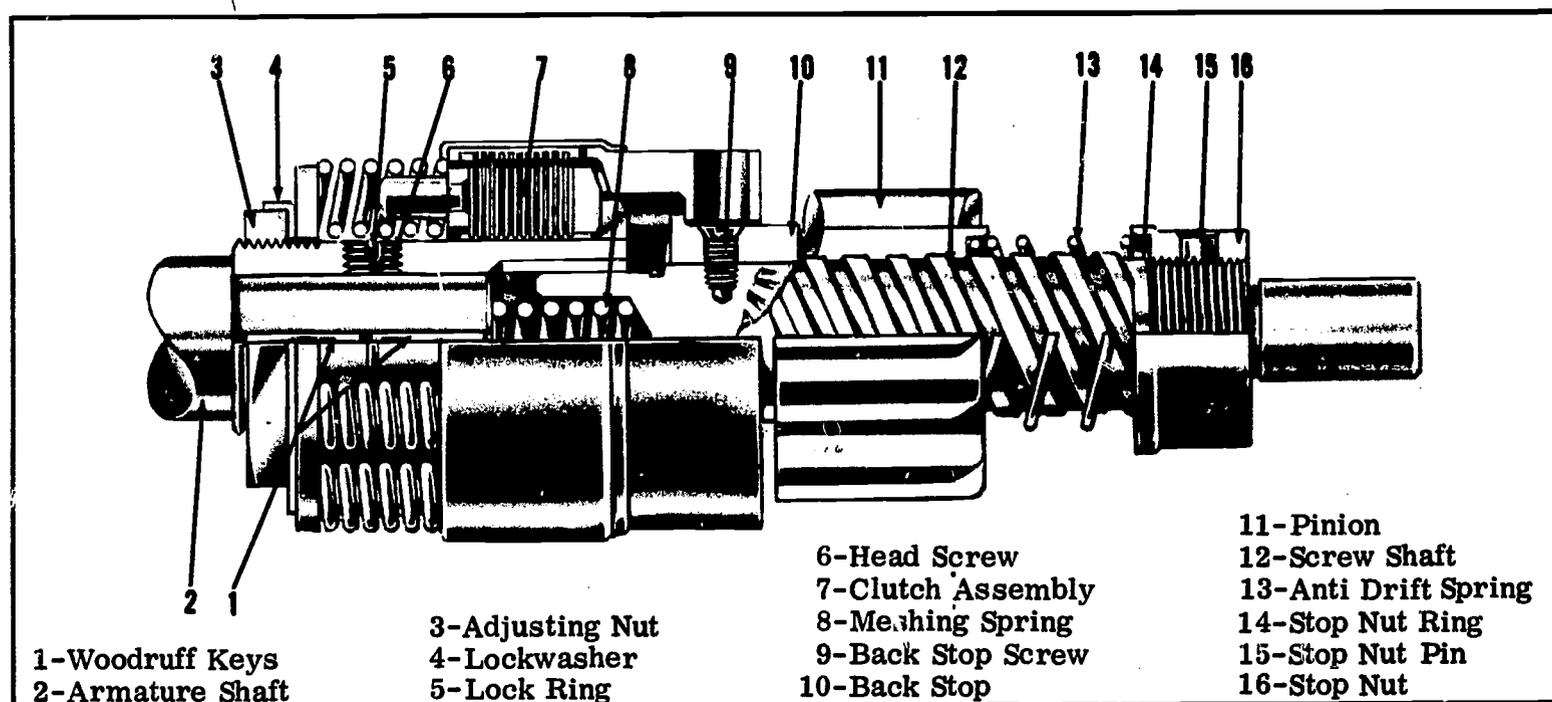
Cutaway view of a Bendix Drive Assembly.
